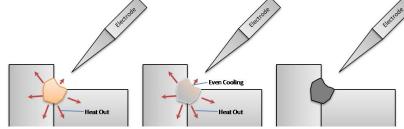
A proper weld joint will help the weld puddle cool uniformly.
